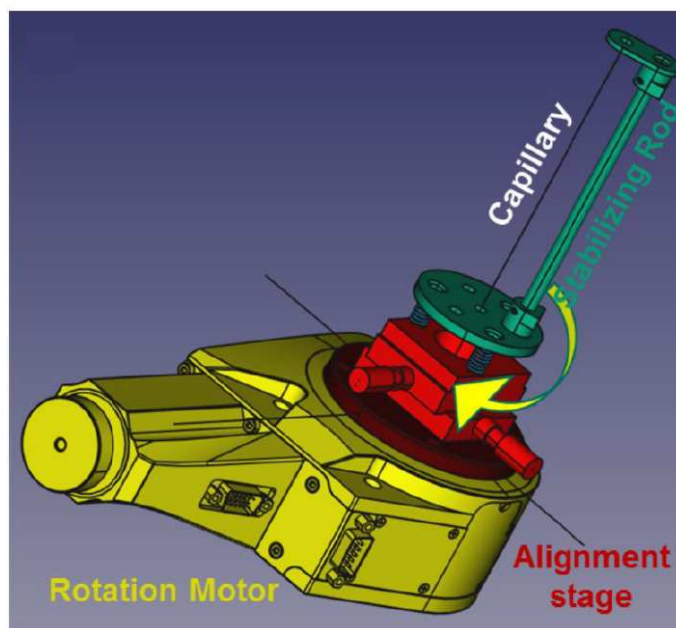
CAD drawing of the aRCTIC setup; Reprinted from Ref. [52].
